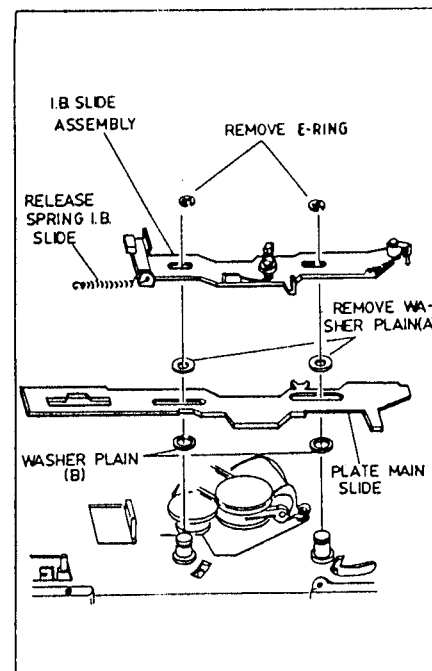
I.B Slide Assembly and Plate Main Slide Removal
